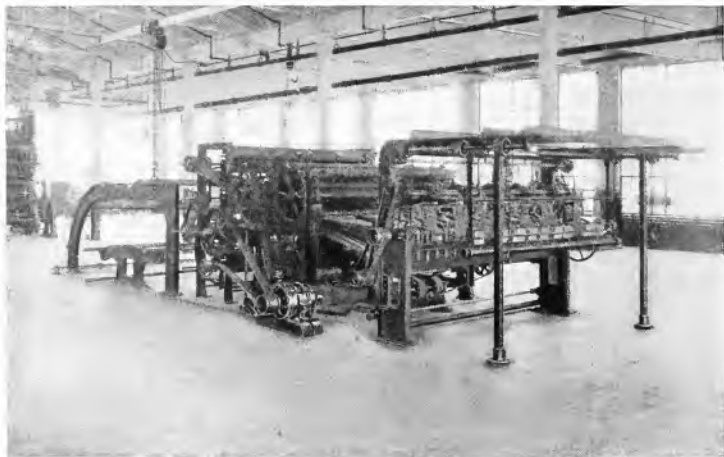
10-h p. Induction Motor Belted to Rewinder.
